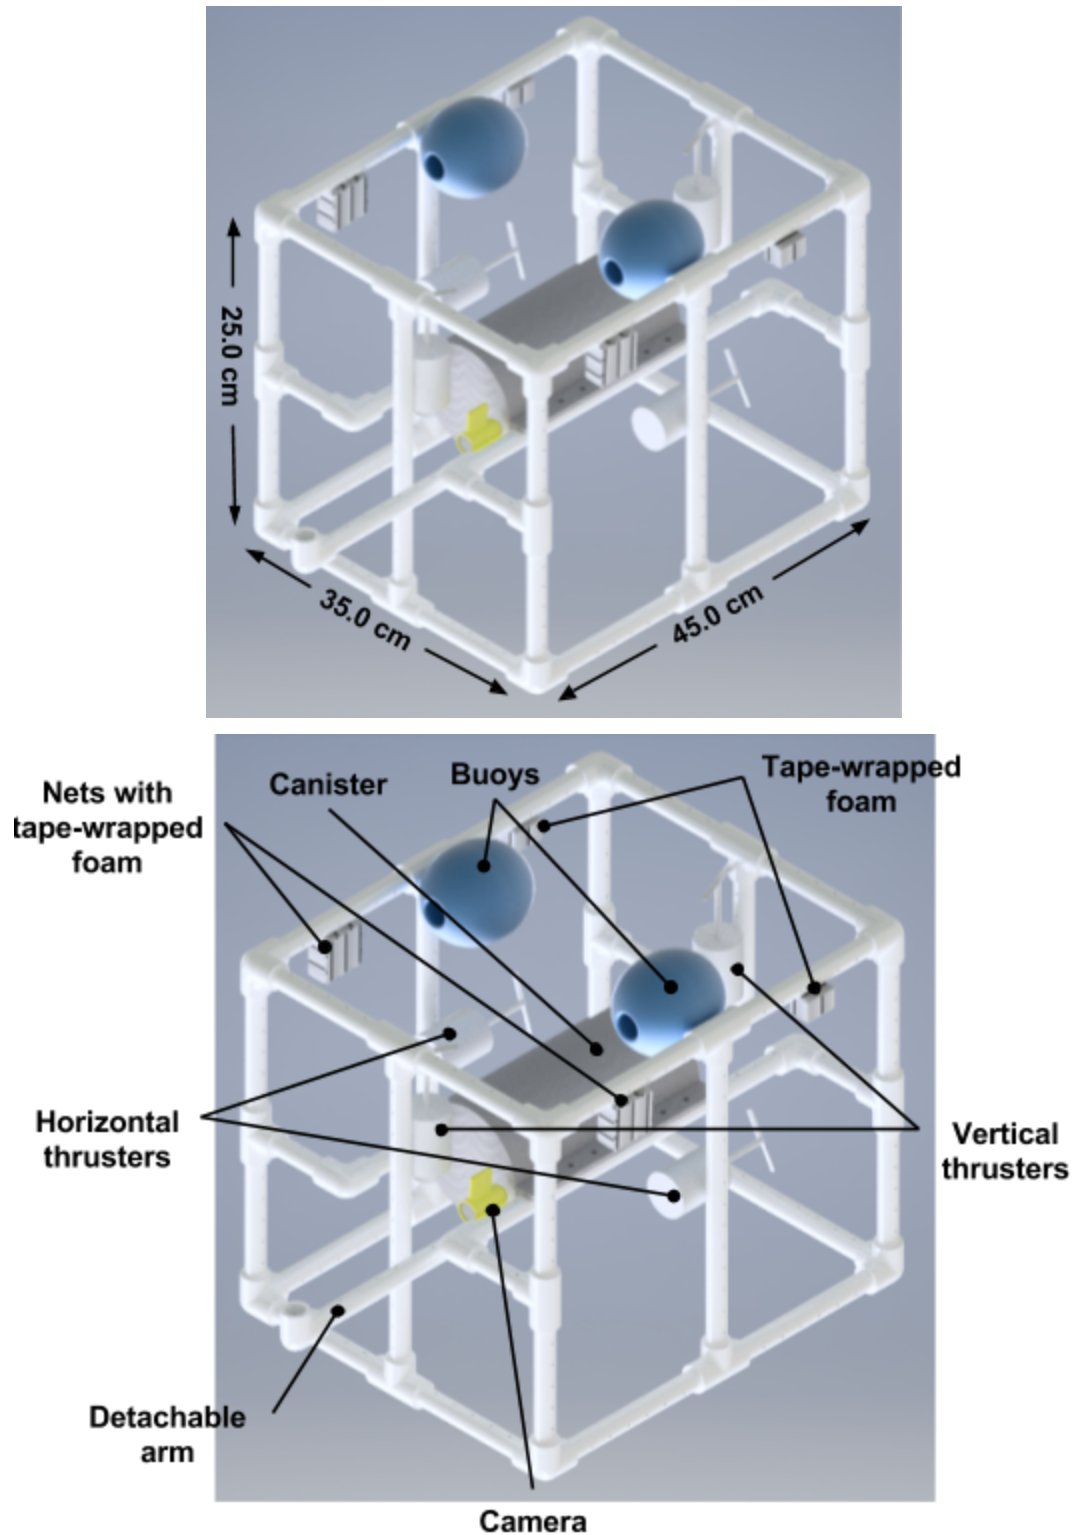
(top) CAD model of ROV design with dimensions. (bottom) CAD model of ROV design with labeled parts
